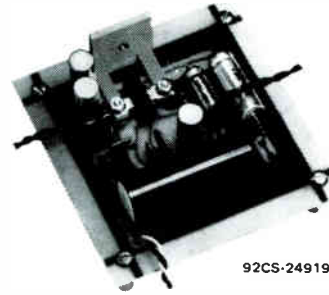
Bottom view of printed-circuit boards shown in Figs.7 and 8.
